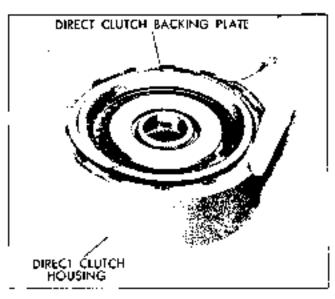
Removing Direct Clutch Backing Plate Step King
